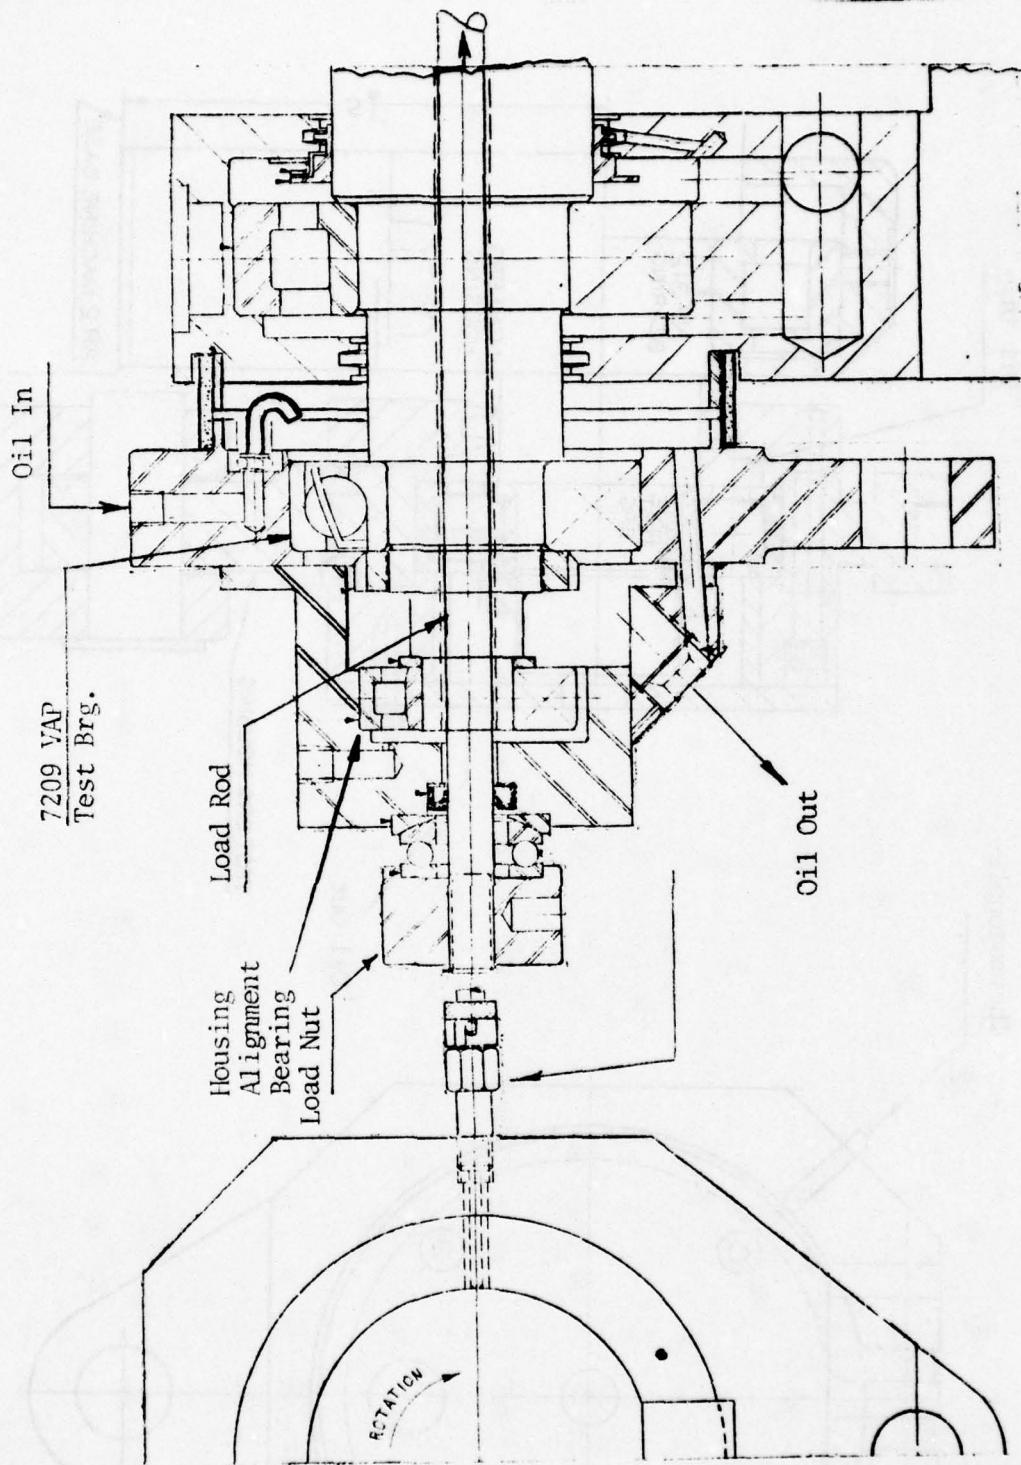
SKF Endurance Test Machine Details of Test Hardware for Angular Contact Ball Bearings
